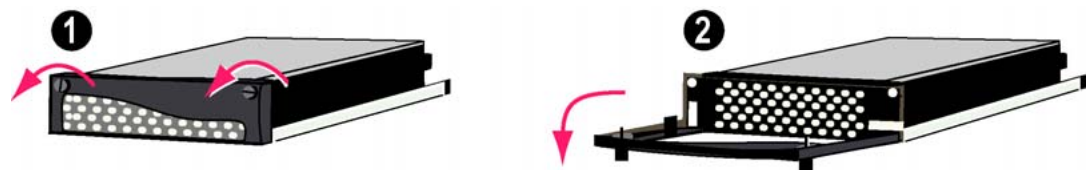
Removing a Drive on a Rapid Eye Unit.
